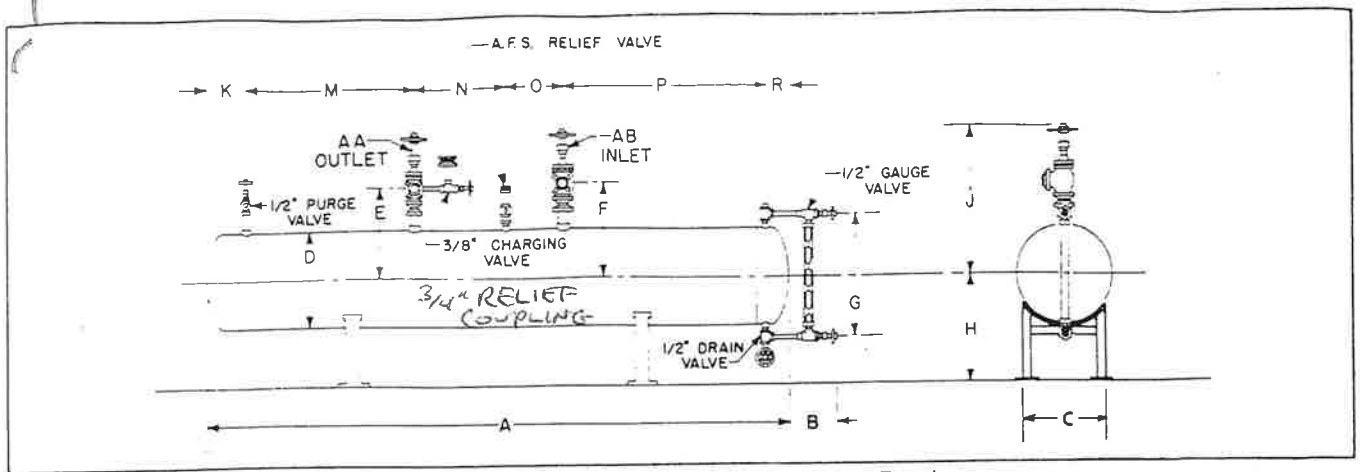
Dimensional Outline RECO Ammonia Receiver
